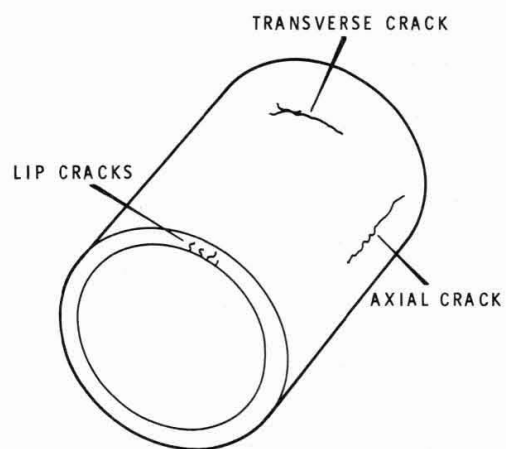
Seam weld defects in rhenium cylinder
